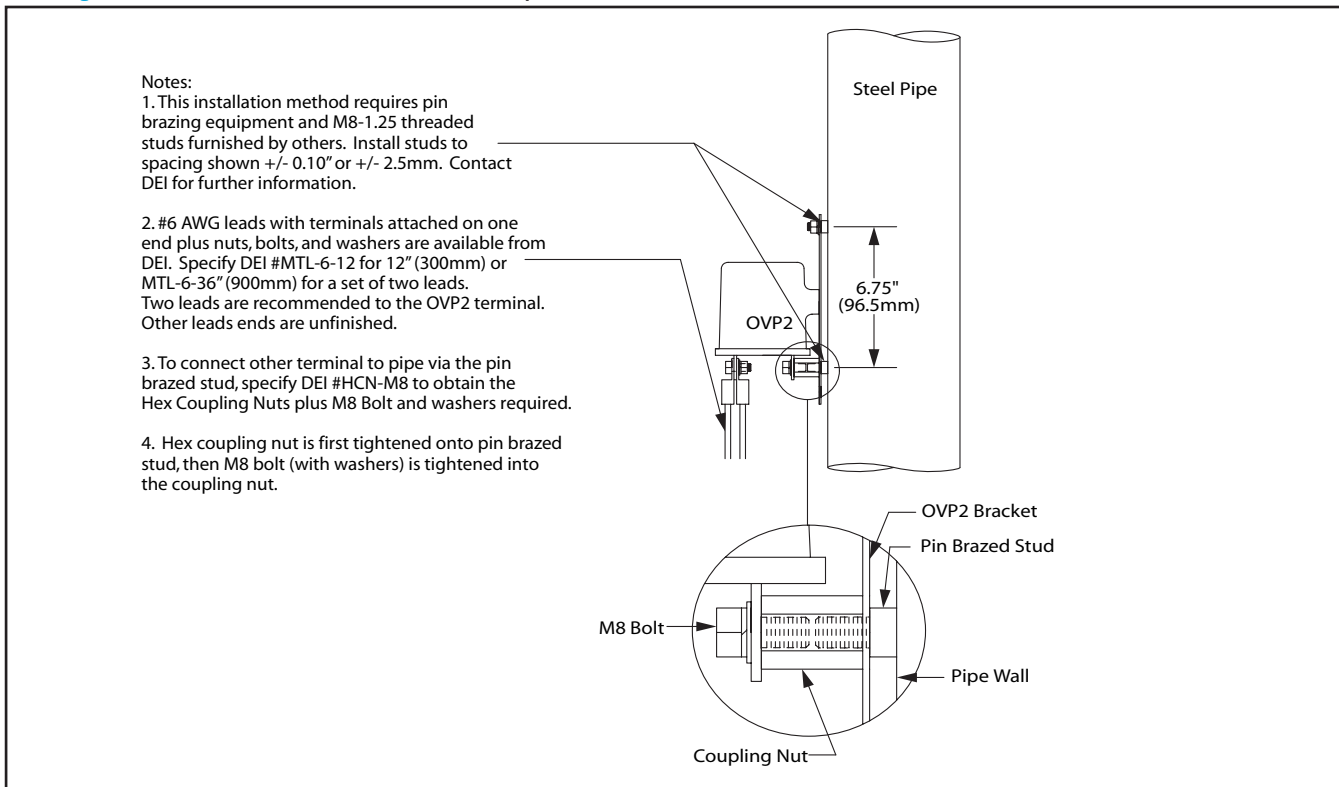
Flange Mount Using Tapped Holes or Pin Brazed Studs
